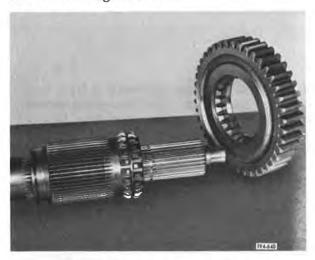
Installing Gear 15. Install third speed gear flanged thrust washer, and fourth speed gear. See Figure 5-954.
